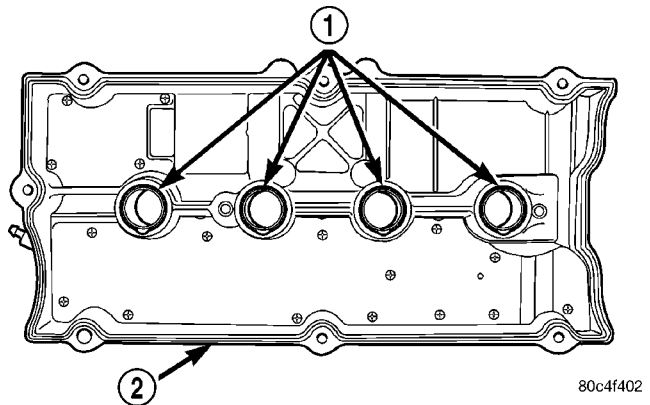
Cylinder Head Cover Gasket and Spark Plug Well Seals
